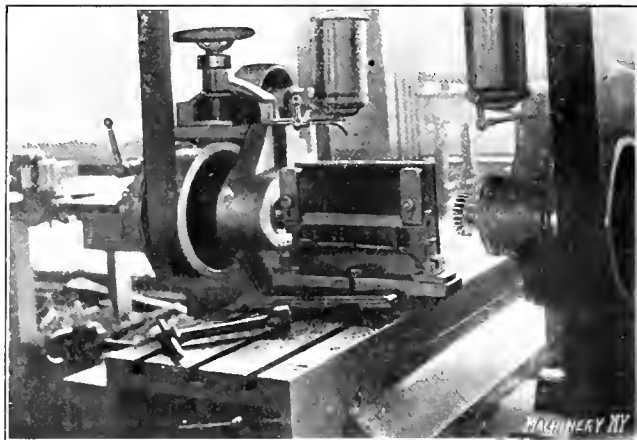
View showing Position of Milling Fixture with Reference to Cutter, when Stationary
